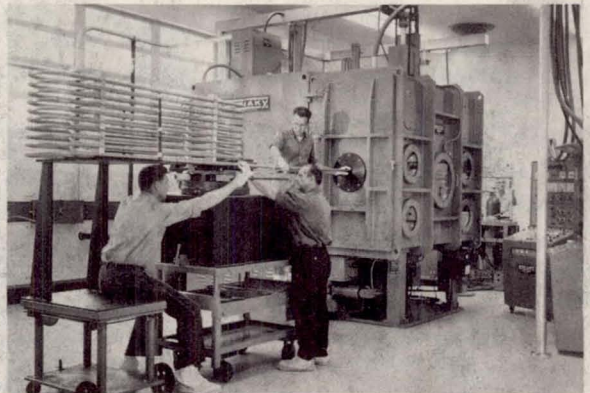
Columbia-1-percent-zirconium liquid-metals heater fabrication. Electron-beam welding.
